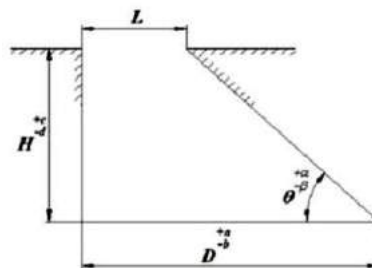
COMPOUND TOLERANCE
